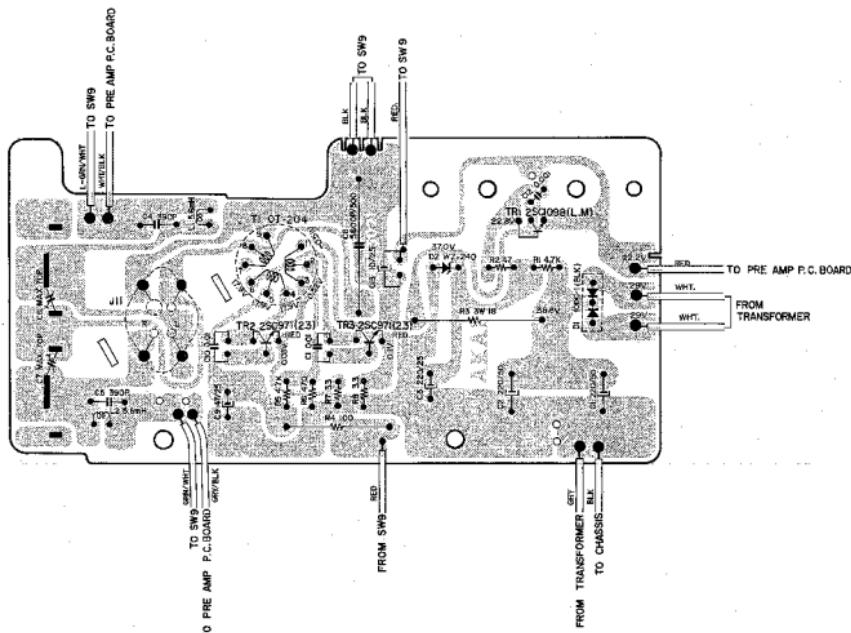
OSC. POWER P.C. BOARD (LE-5021)
